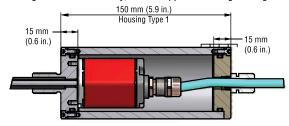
Model RS Rod-style sensor dimension reference (shown with *Type 1* housing)
